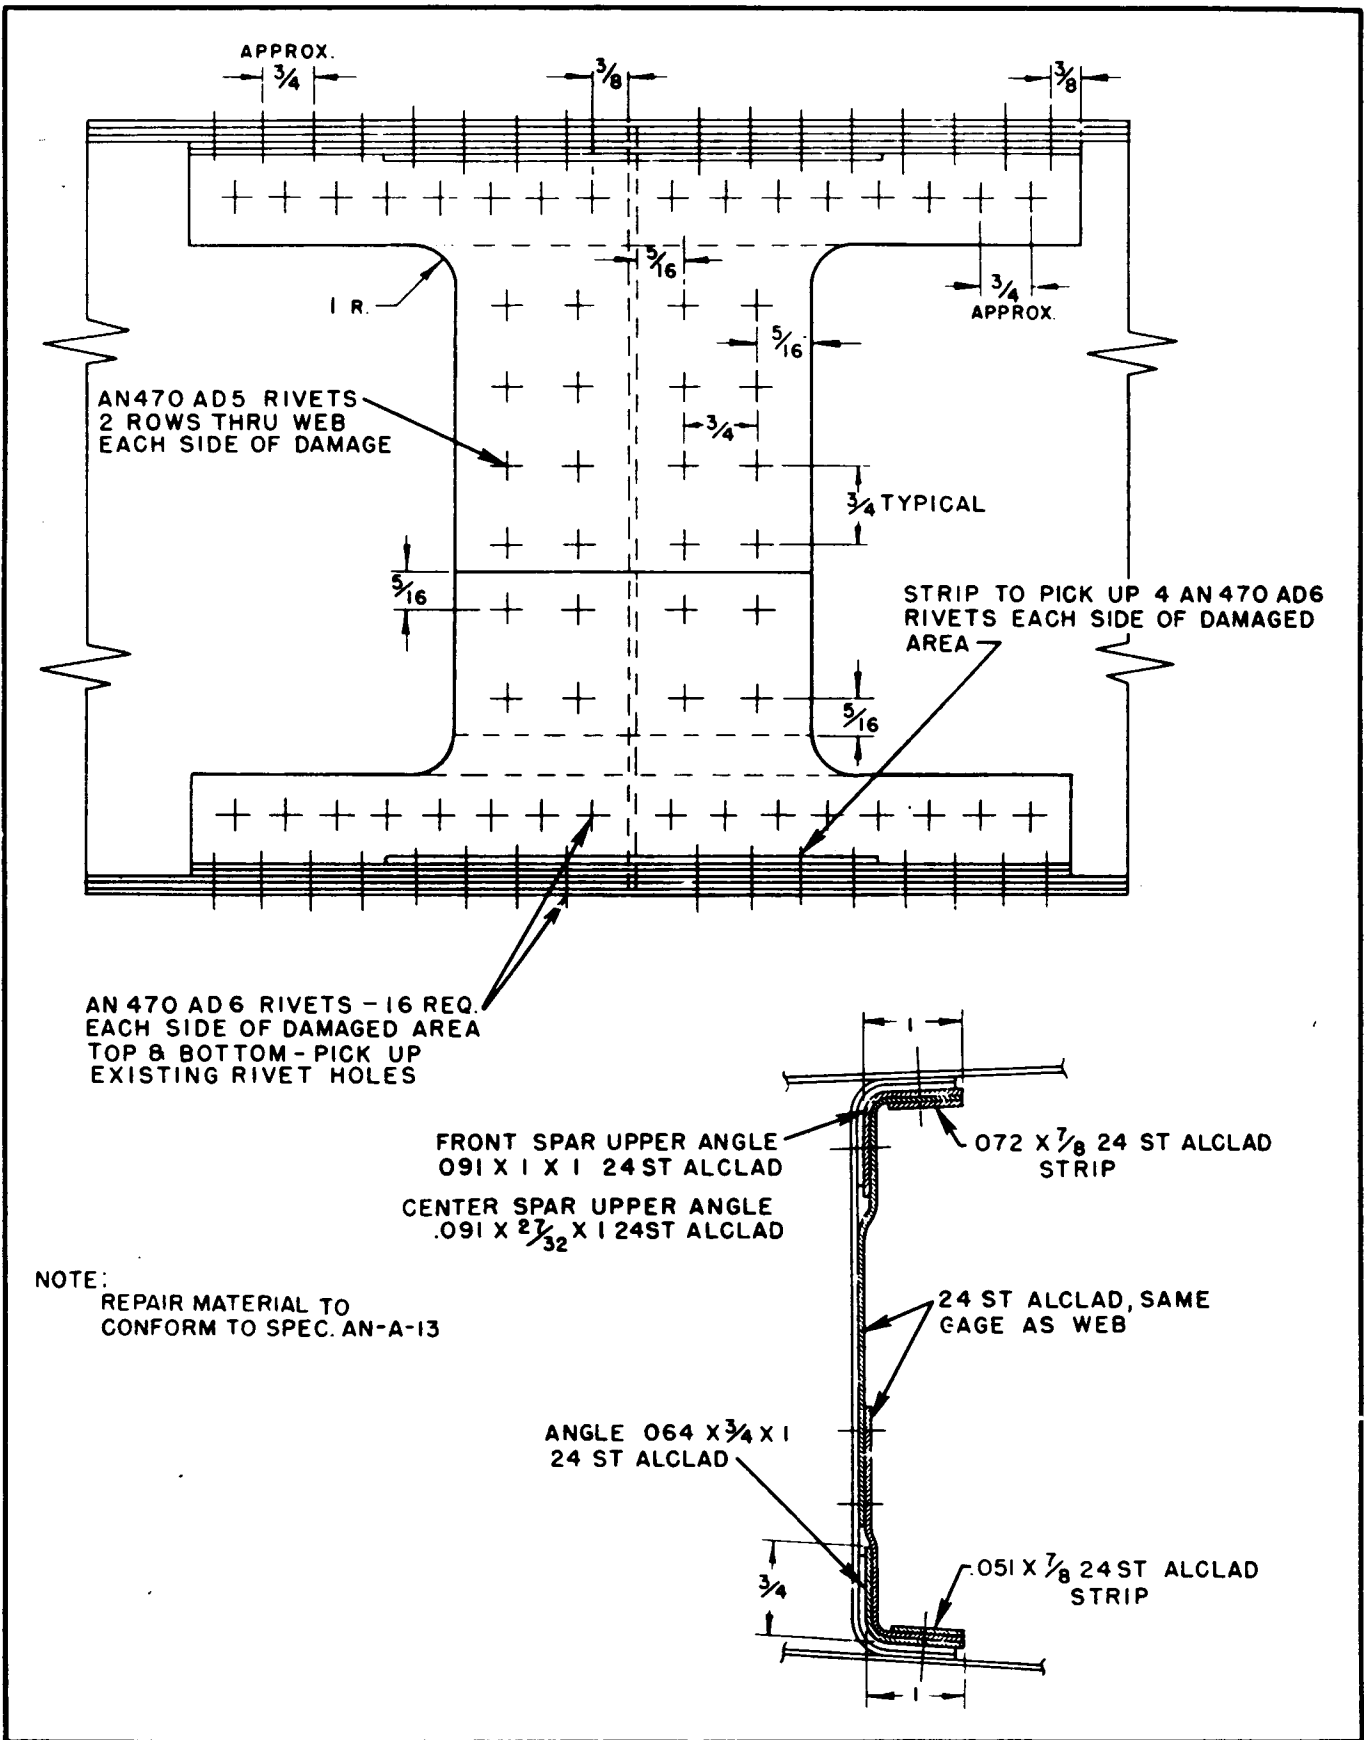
FRONT BEAM AND CENTER BEAM SPLICE
